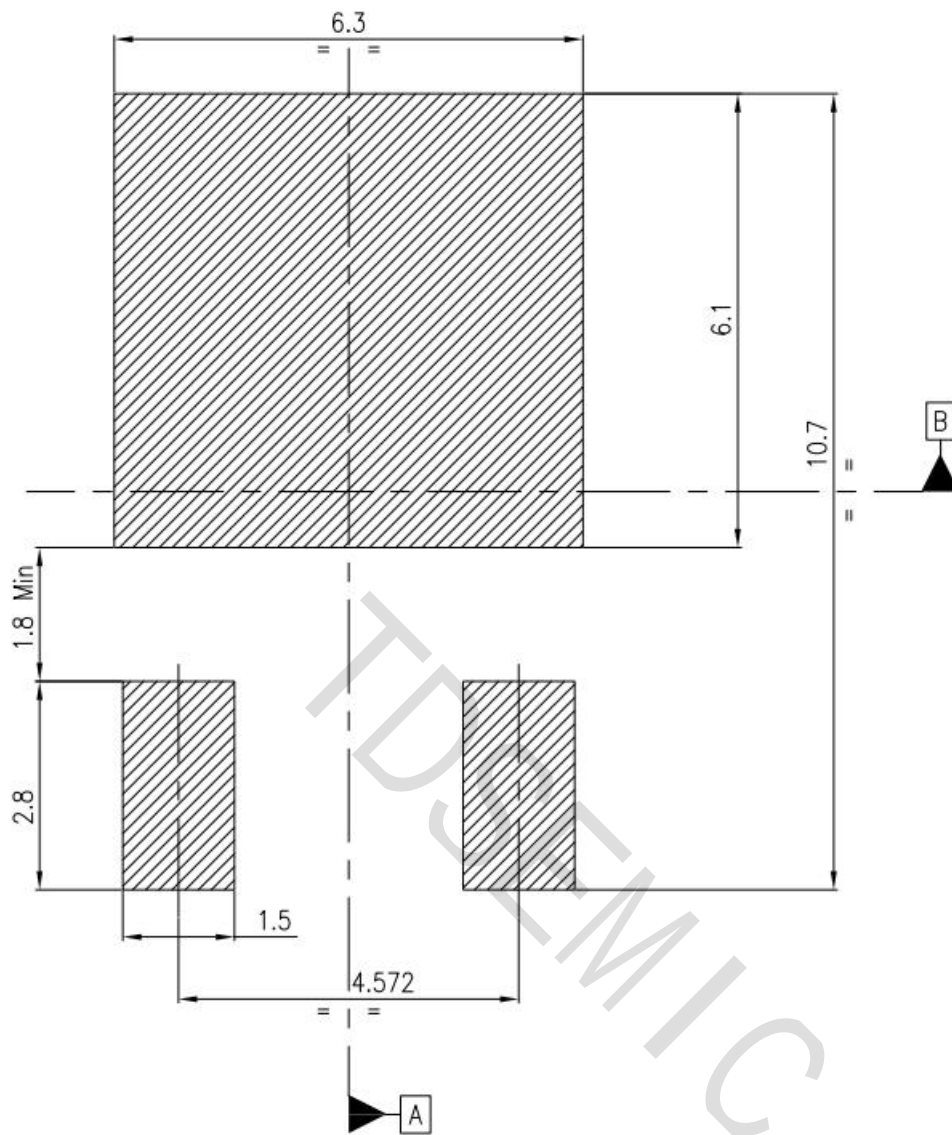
TO-252 recommended footprint (dimensions are in mm)
